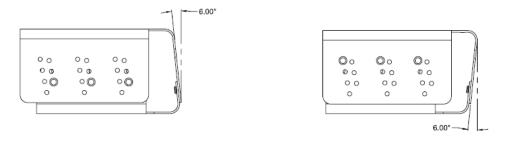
Lancair IV/IV-P GMU 44 Mounting Bracket Assembly
